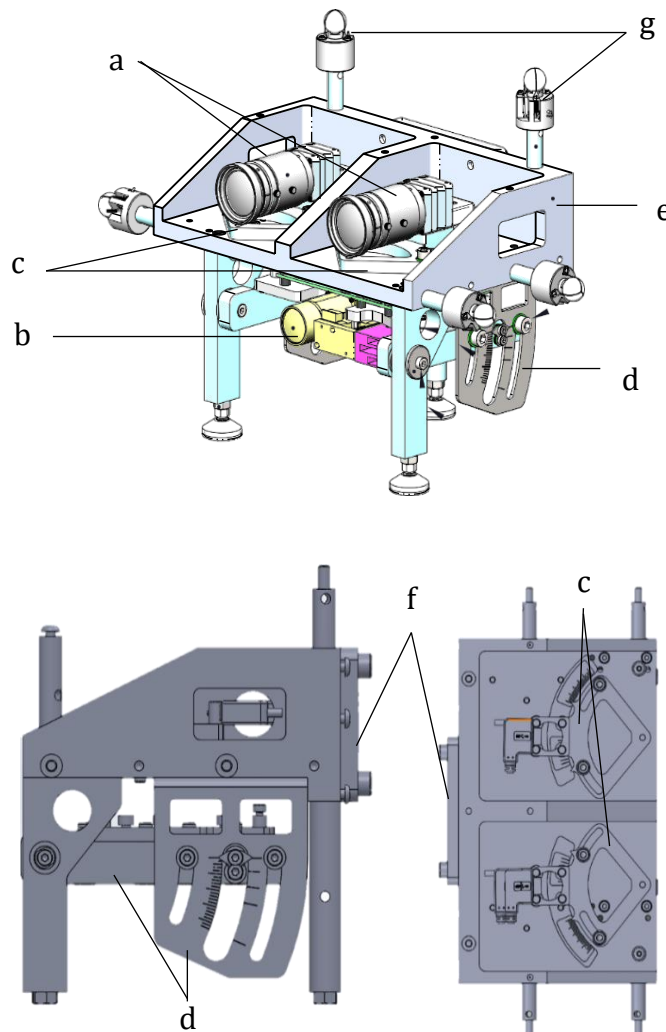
Design of the 3D scanner: (a) industrial cameras; (b) projector; (c) Camera rotational frame; (d) Projector rotational frame; (e) aluminium mounting frame; (f) Scanner-robot fixing part; (g) Laser rangefinder targets
